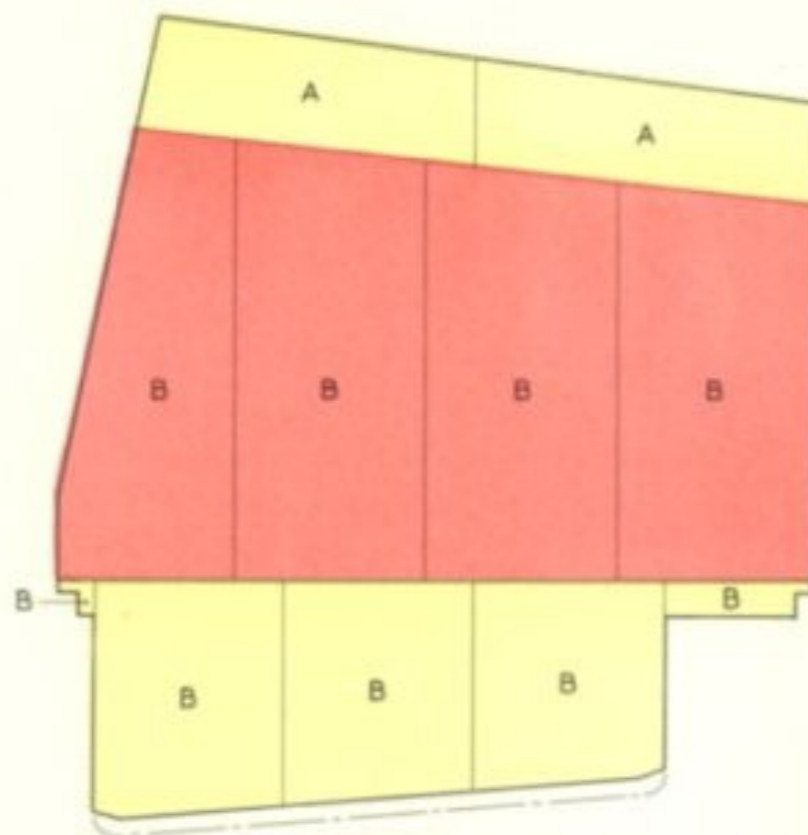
A Outboard elevator - No.3 elevon (No. 6 opposite hand)
